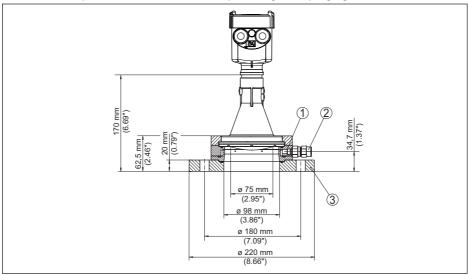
VEGAPULS 6X, adapter flange and purging air connection DN 100 PN 6
